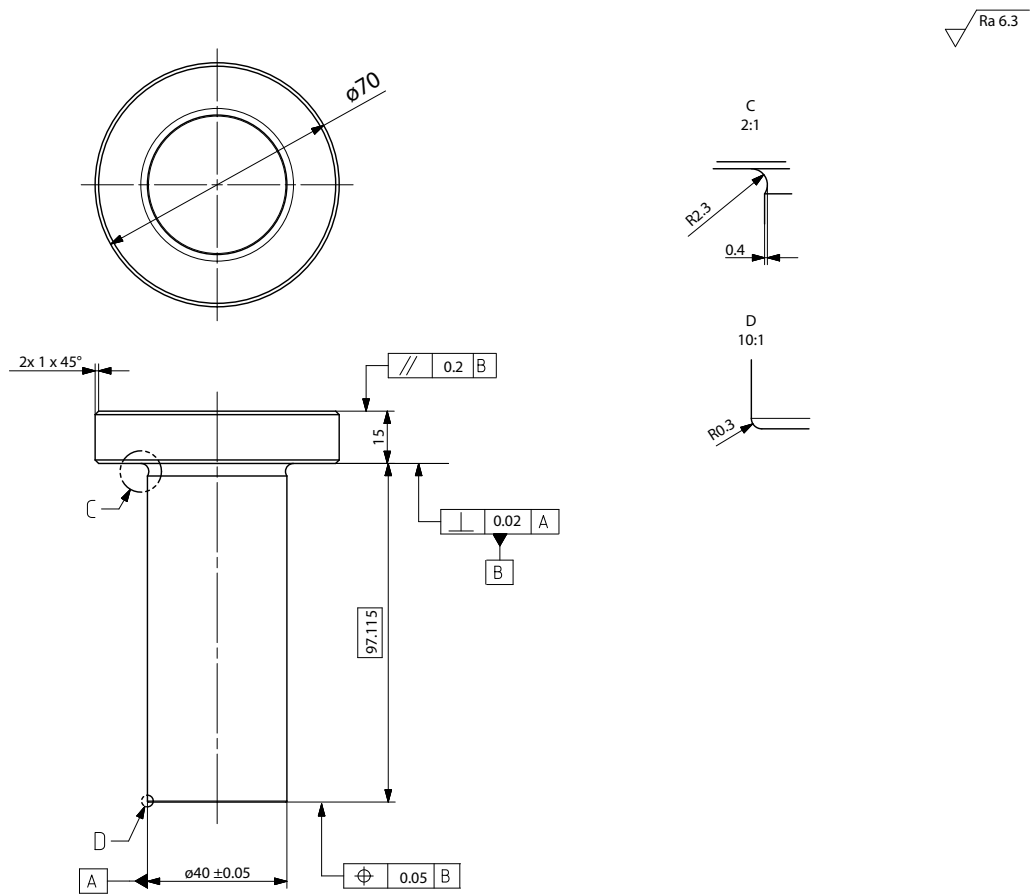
Pressing tool for needle bearing (2 of 4) - Front needle bearing
